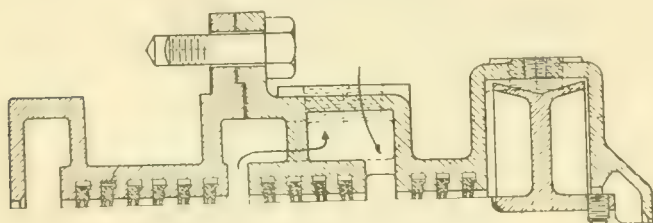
SECTION THROUGH ONE SIDE OF HIGH-PRESSURE GLAND
